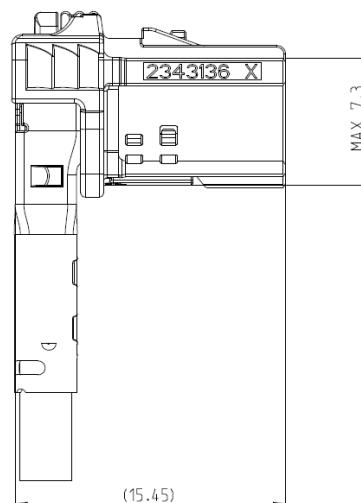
MAXIMUM DIMENSION WHEN TPA IS IN ENDLCK POSITION
